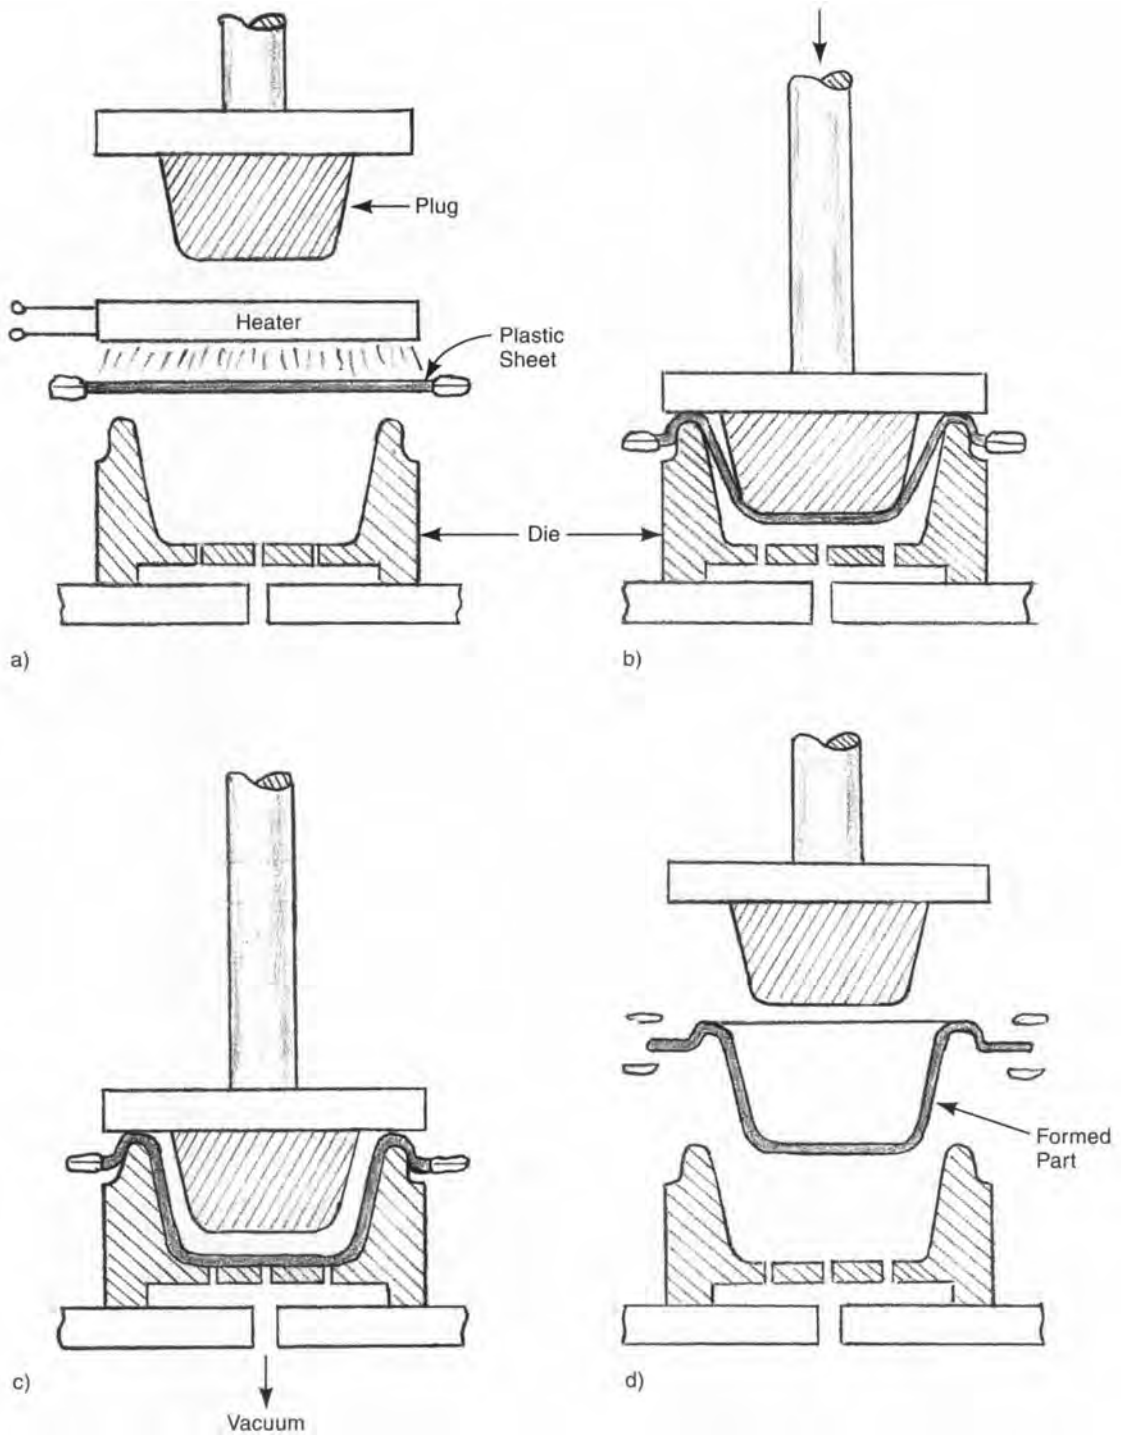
D4 Plug-assist forming: a) The plastic sheet is placed above the mold and heated. (The plug is also heated but to a slightly lower temperature.) b) The heater is removed and the plug descends to move the sheet into the mold cavity. c) A vacuum draws the sheet against the walls of the mold cavity, where the sheet cools and sets to its formed shape. d) The plug retracts and the formed part is removed from the mold.
